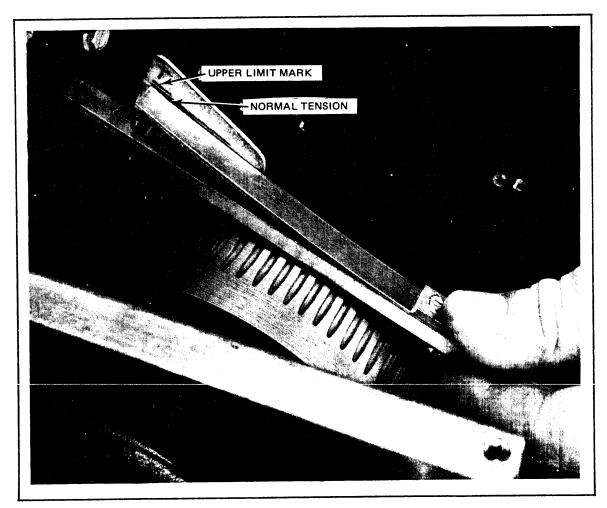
Checking Shuttle Drive Belt Tension, Using Tensiometer
